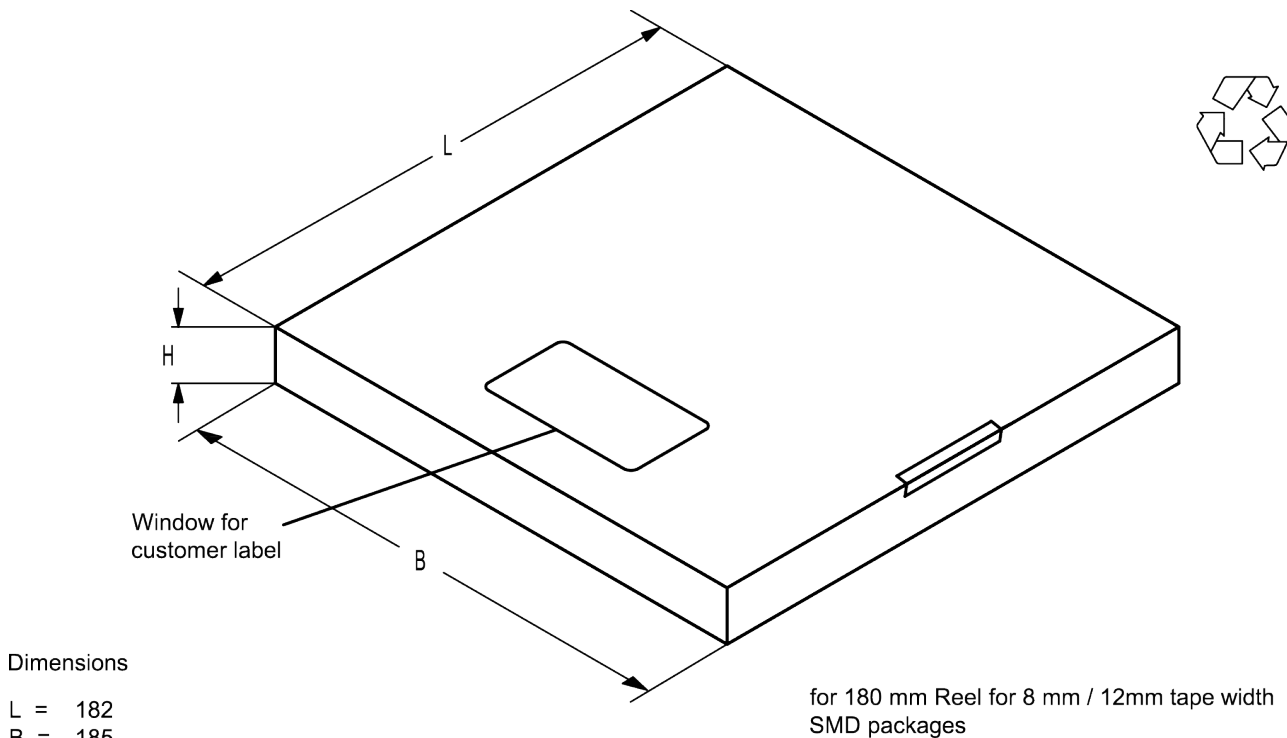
Drawing of folding box for reel with diameter of 180 mm.
